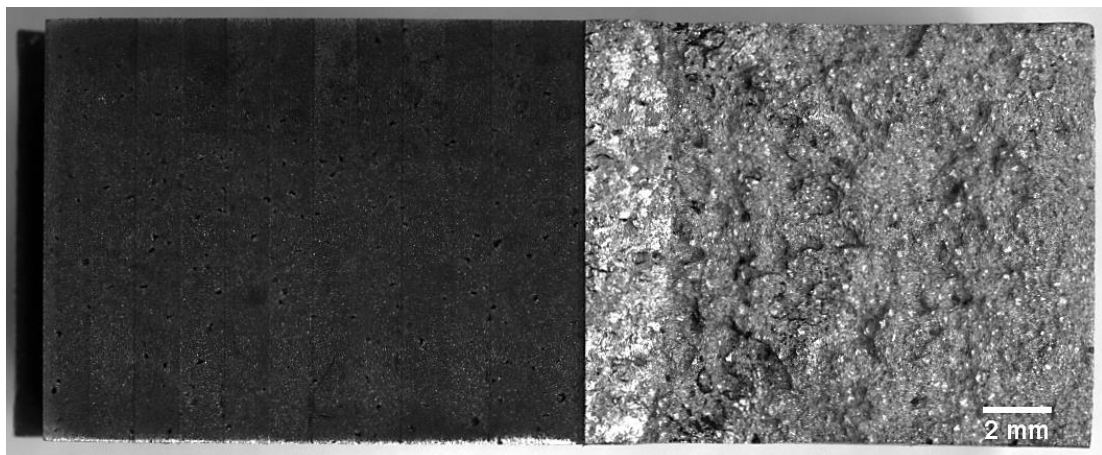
Fracture surface of 1Cu 10_155 C(T) specimen.
